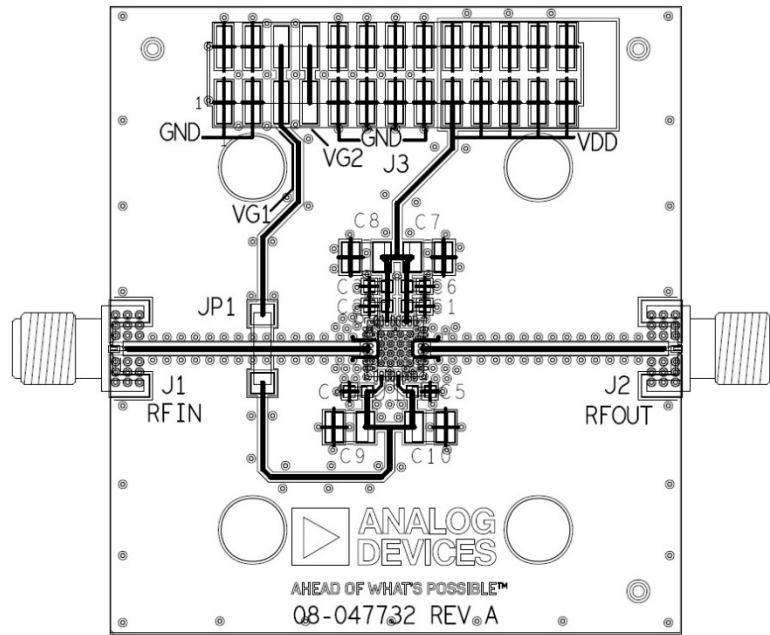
EV1HMC114PM5 (08-047732) Evaluation Board PCB
